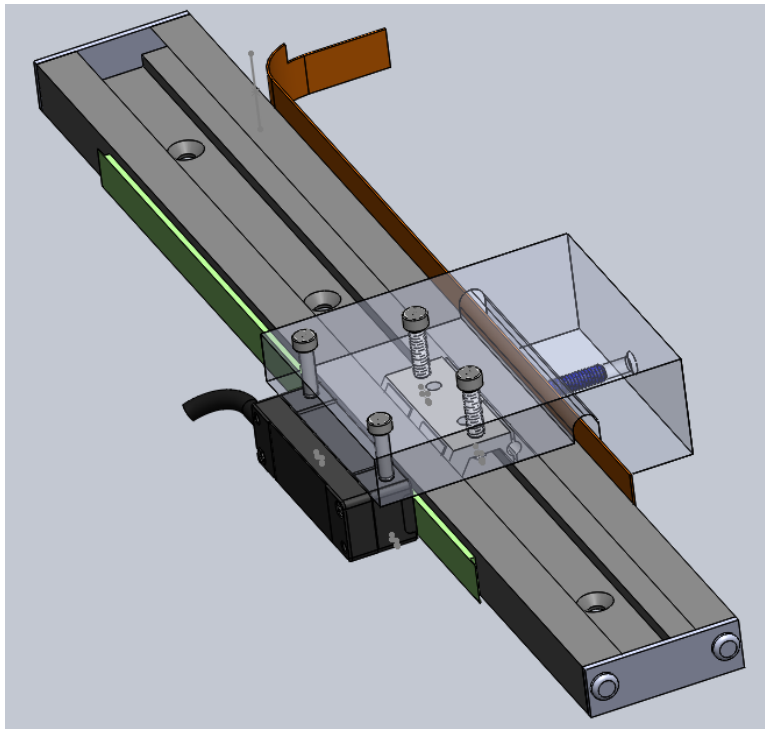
Benchtop Test Fixture Assembly CAD
